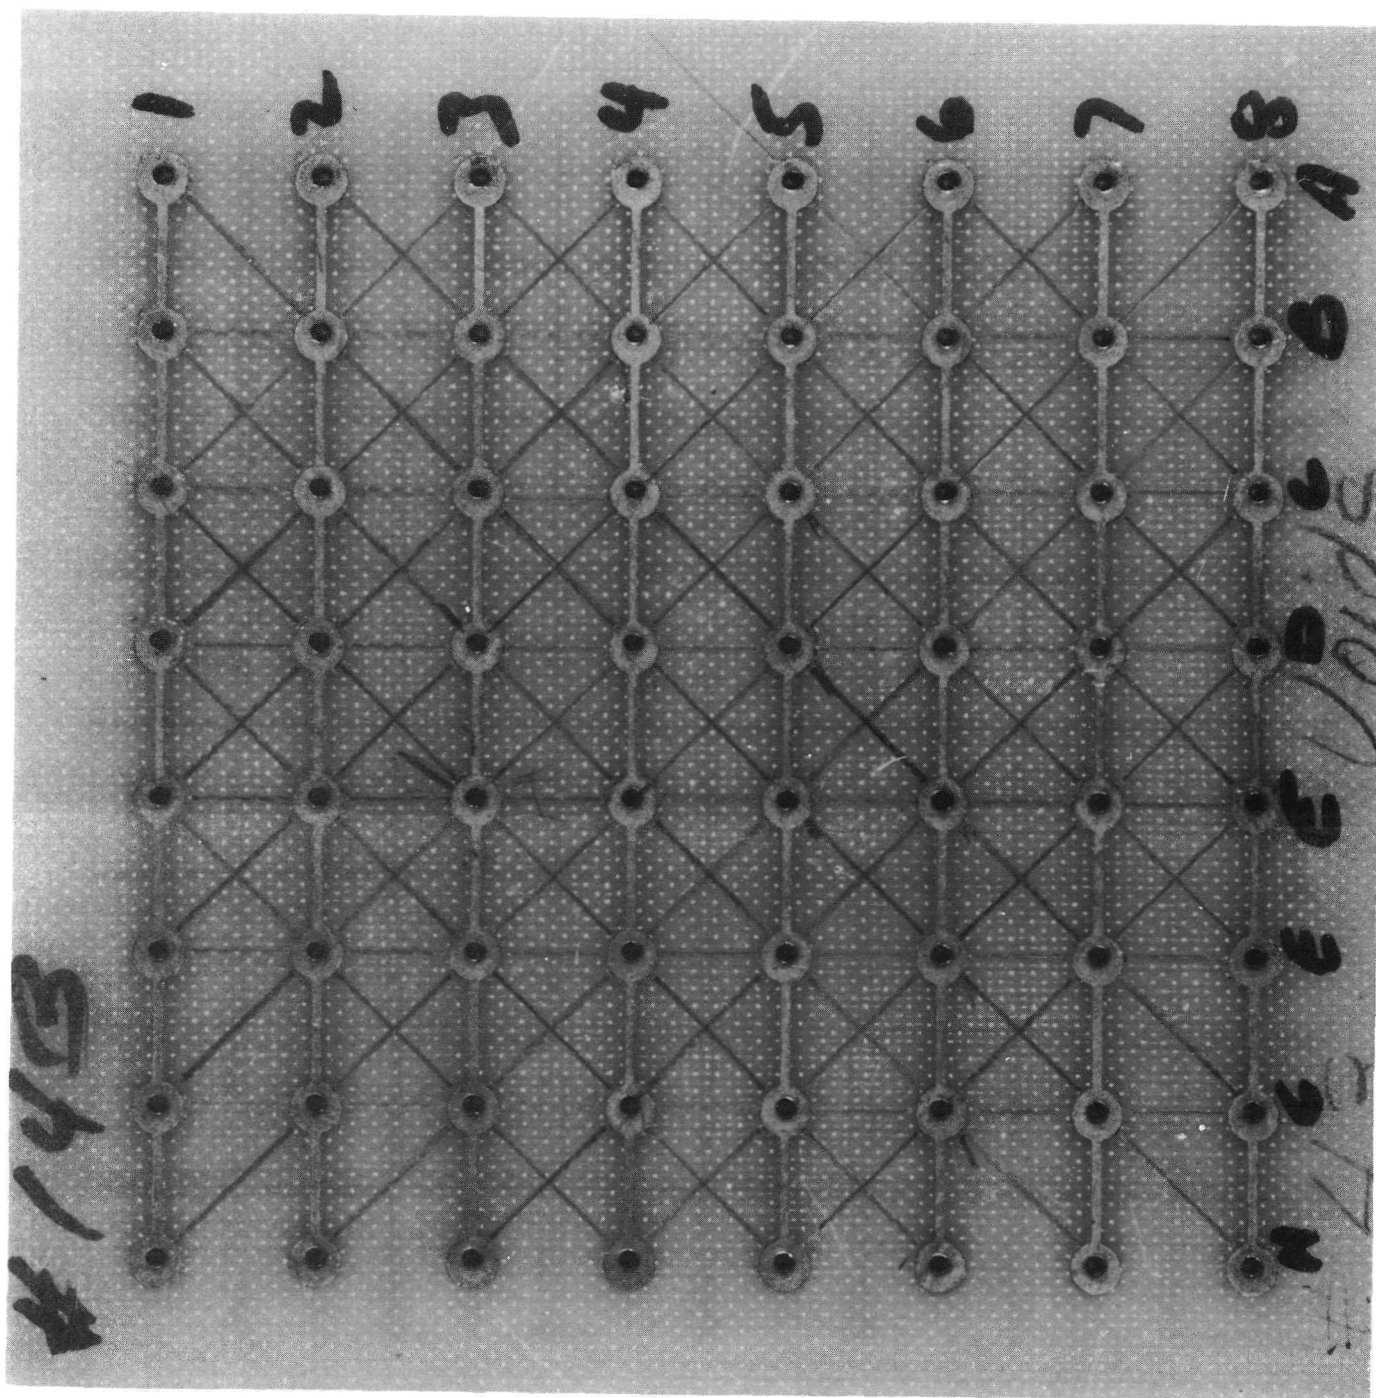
Typical Multilayer Test Board with Hole Size for Evaluation of 0.030 in. Probe
